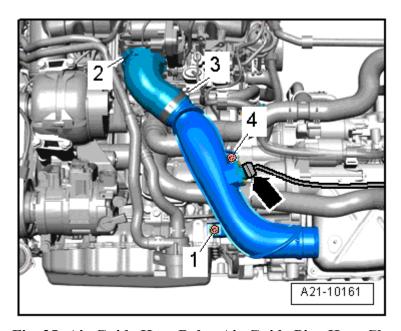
Air Guide Hose Bolts, Air Guide Pipe Hose Clamps & Electrical Harness Connector
